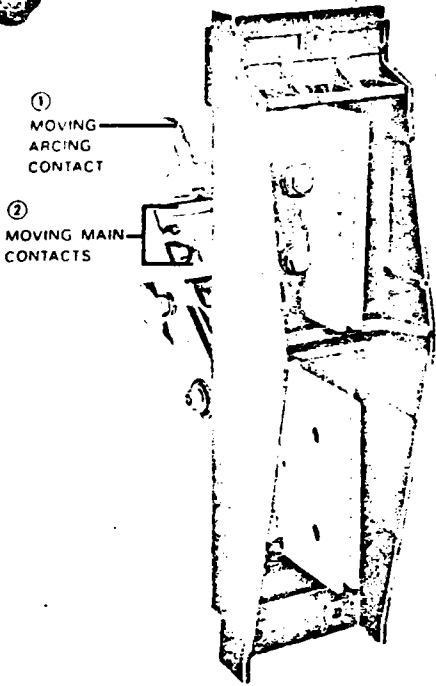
Type DS-632 Pole Unit Assembly—Rear View
